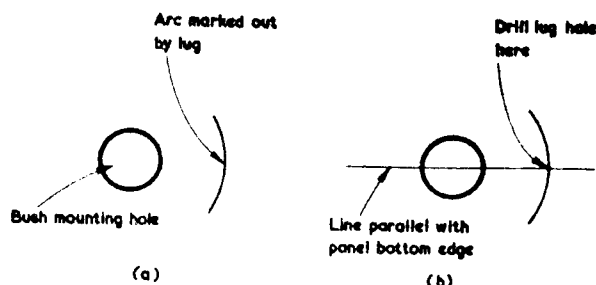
(a) Marking out an arc on the panel with the aid of the locating lug
